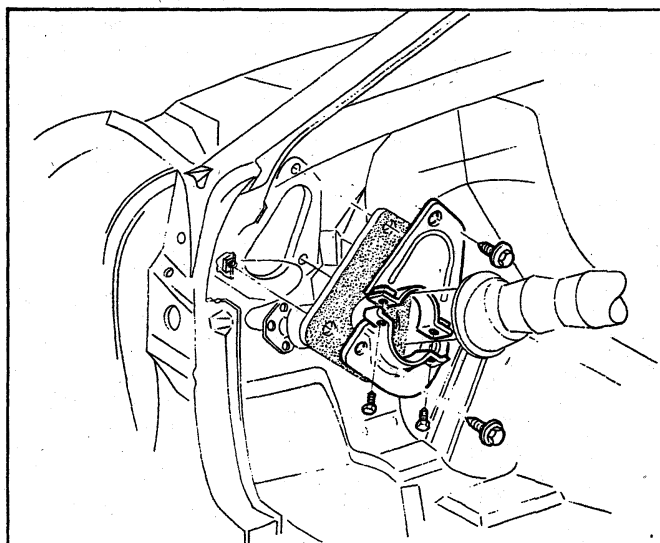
Removing or Installing Dash Panel Covers and Seal
